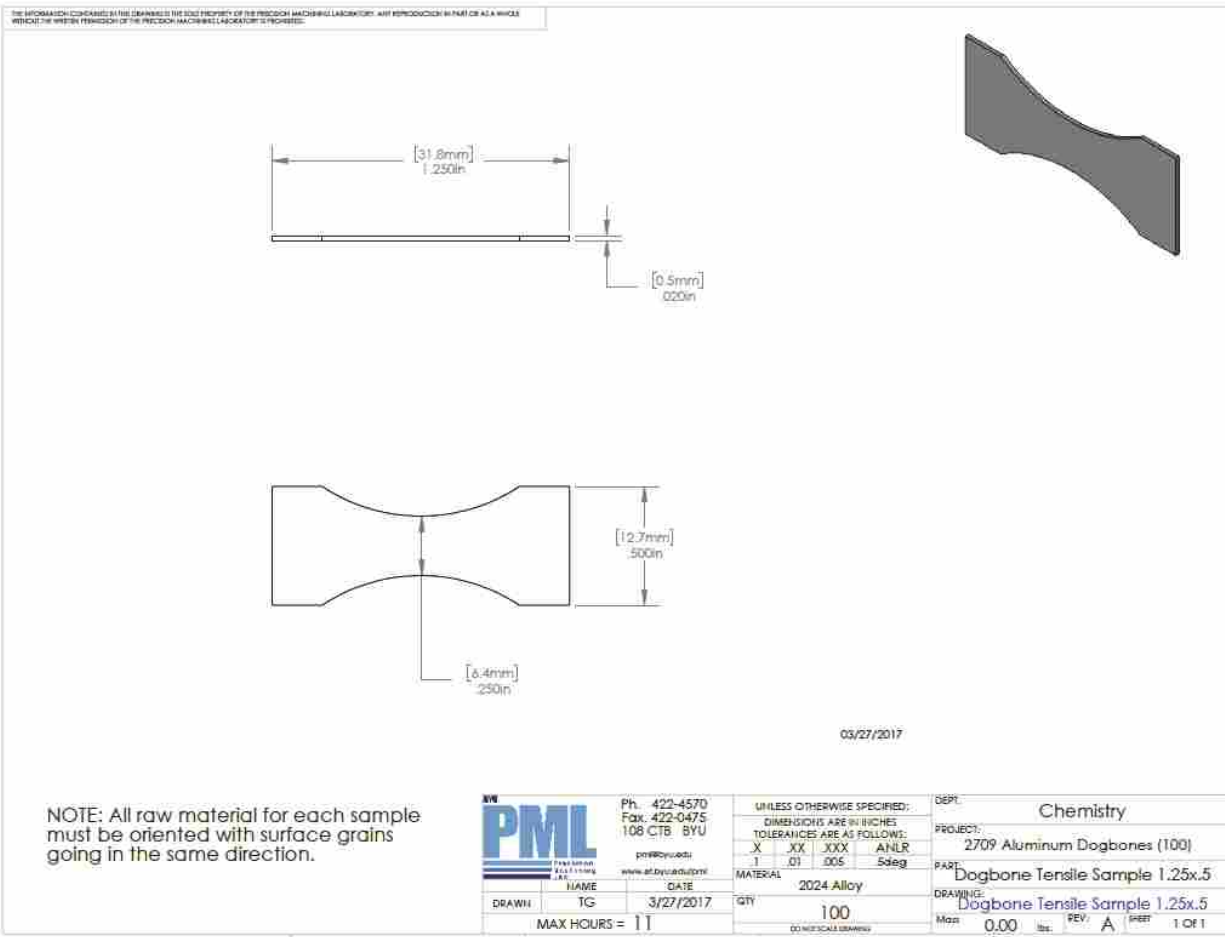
Technical drawing for the 2024 aluminum samples.
